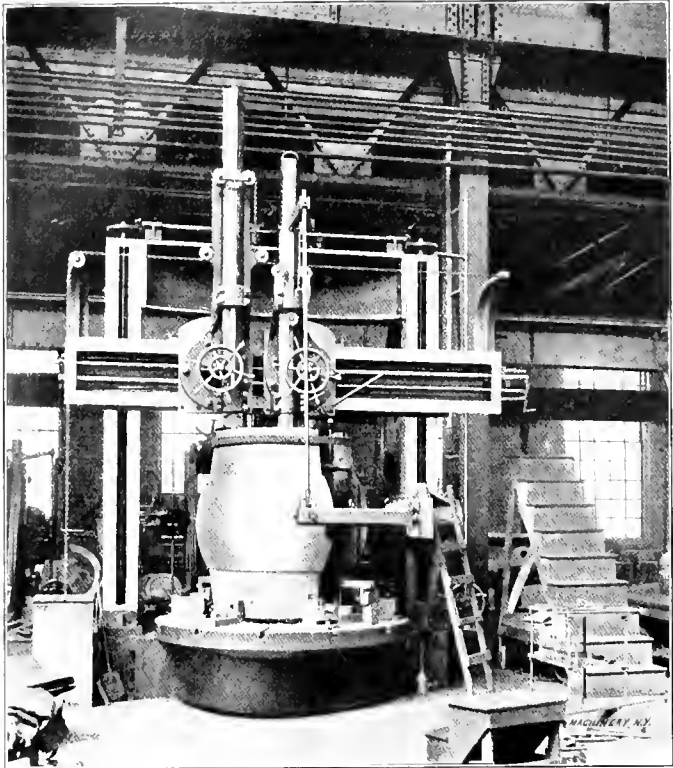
Boring Mill with Rig for Turning Spherical Shells.
